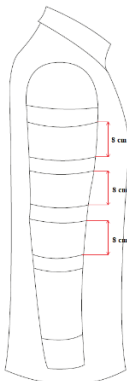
Technical drawing and opening dimensions of the shirt sleeve with manipulation technique (c)
